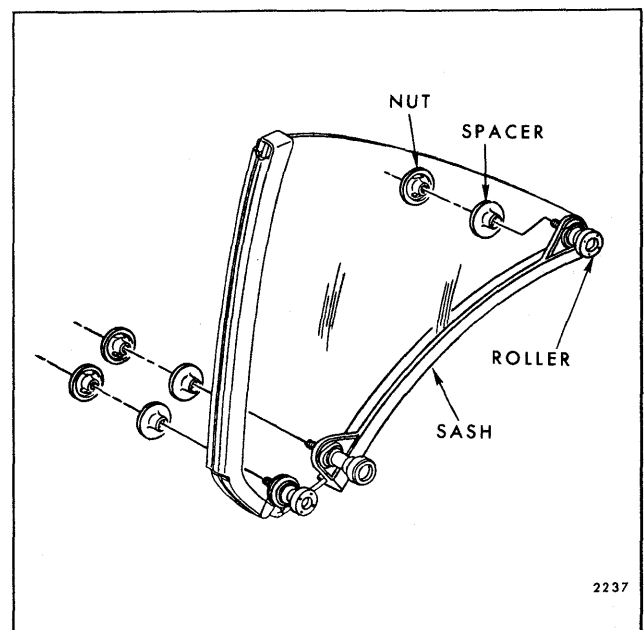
Rear Quarter Window Assembly - "E" Body Styles
